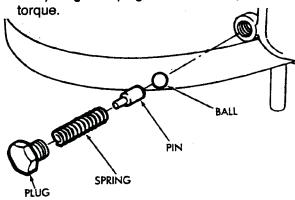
Install Detent Ball, Pin, Spring And Plug
